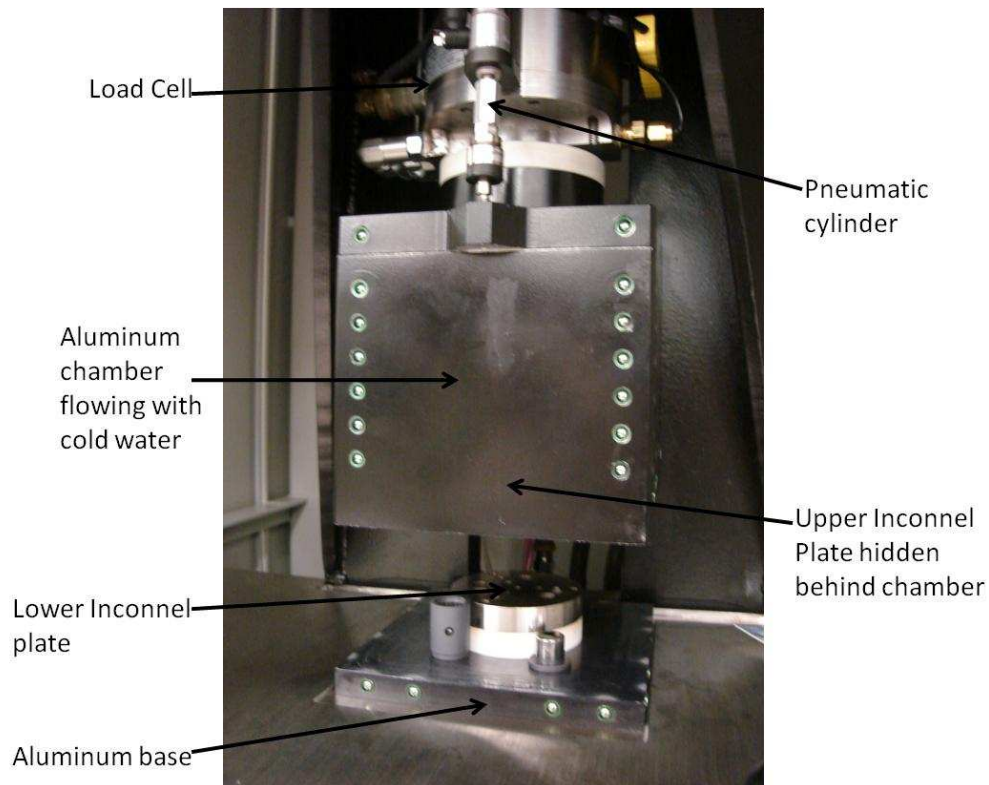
Chamber of Second Generation Molding Machine [21]
